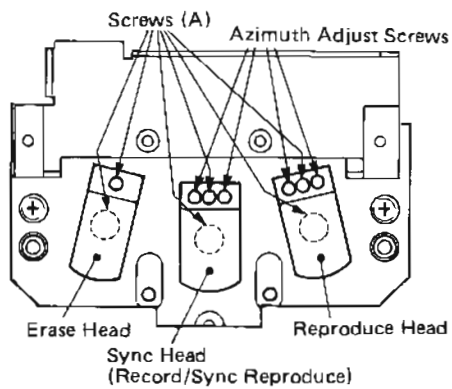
Head Contact and Azimuth Adjust Screws
